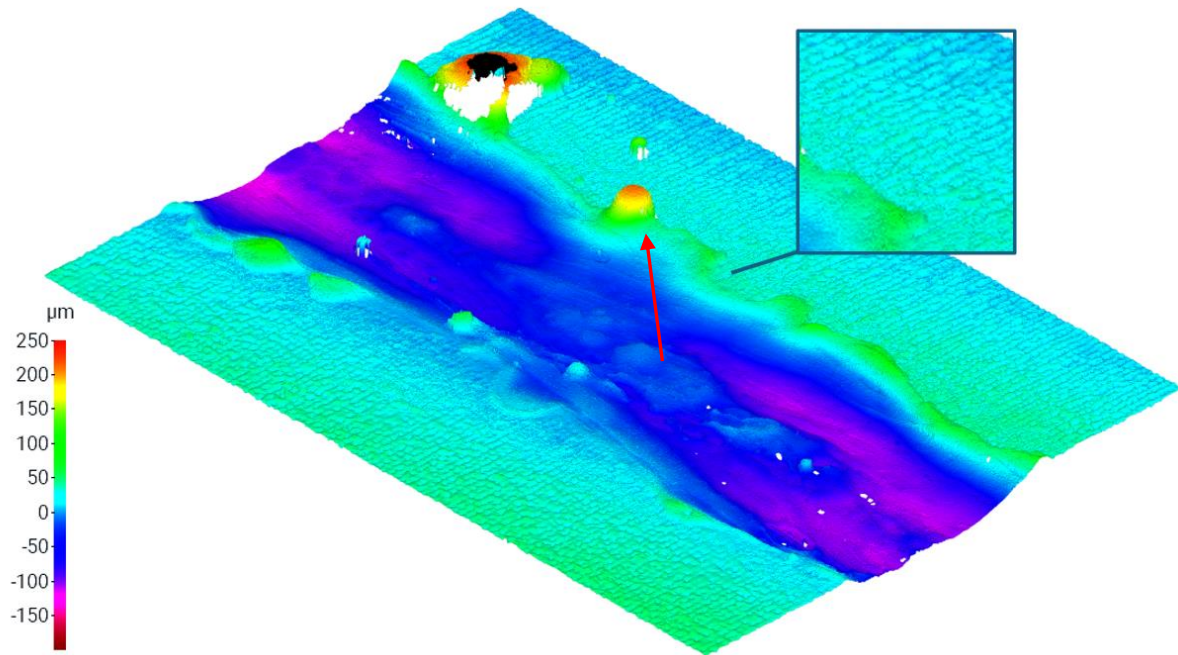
Laser cleaned sample surface before welding. The height-colour indicator is on the left.
